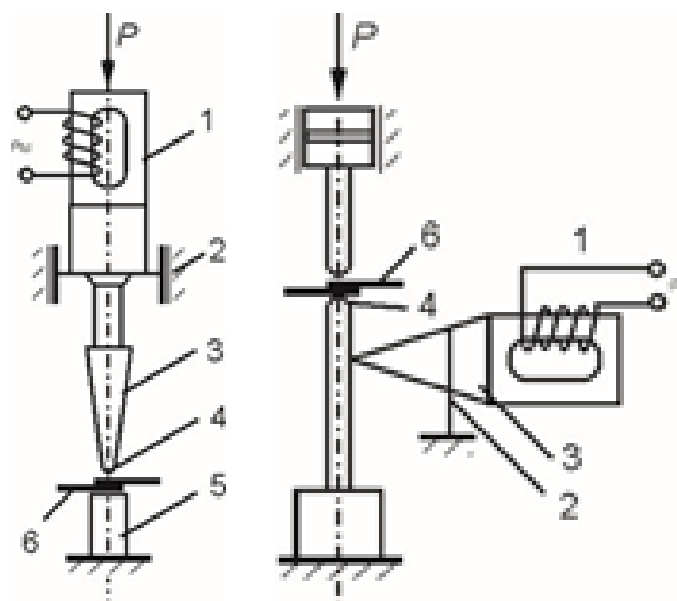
Schematic diagrams of magnetostriction welding machines for the welding of: a) plastics and b) metals (1 – magnetostriction transducer, 2 – machine housing, 3 – wave transformer, 4 – sonotrode, 5 – anvil, 6 – elements, P – force) [5, 8]
